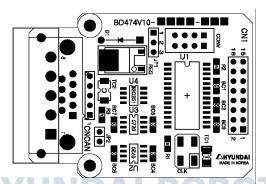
Exterior View(layout) of CAN Board(BD474)
